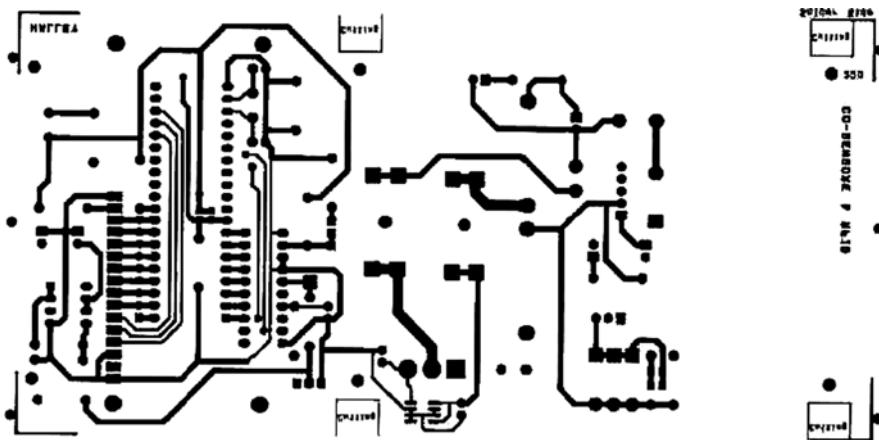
PCB (bottom) layout of RFID and sensor unit of CO-monitoring device
